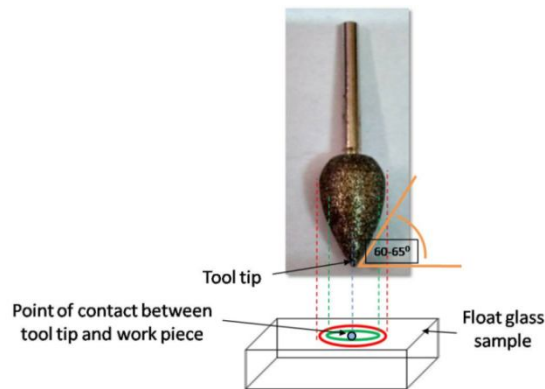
Criteria of drilling by the pinpointed conical tool
